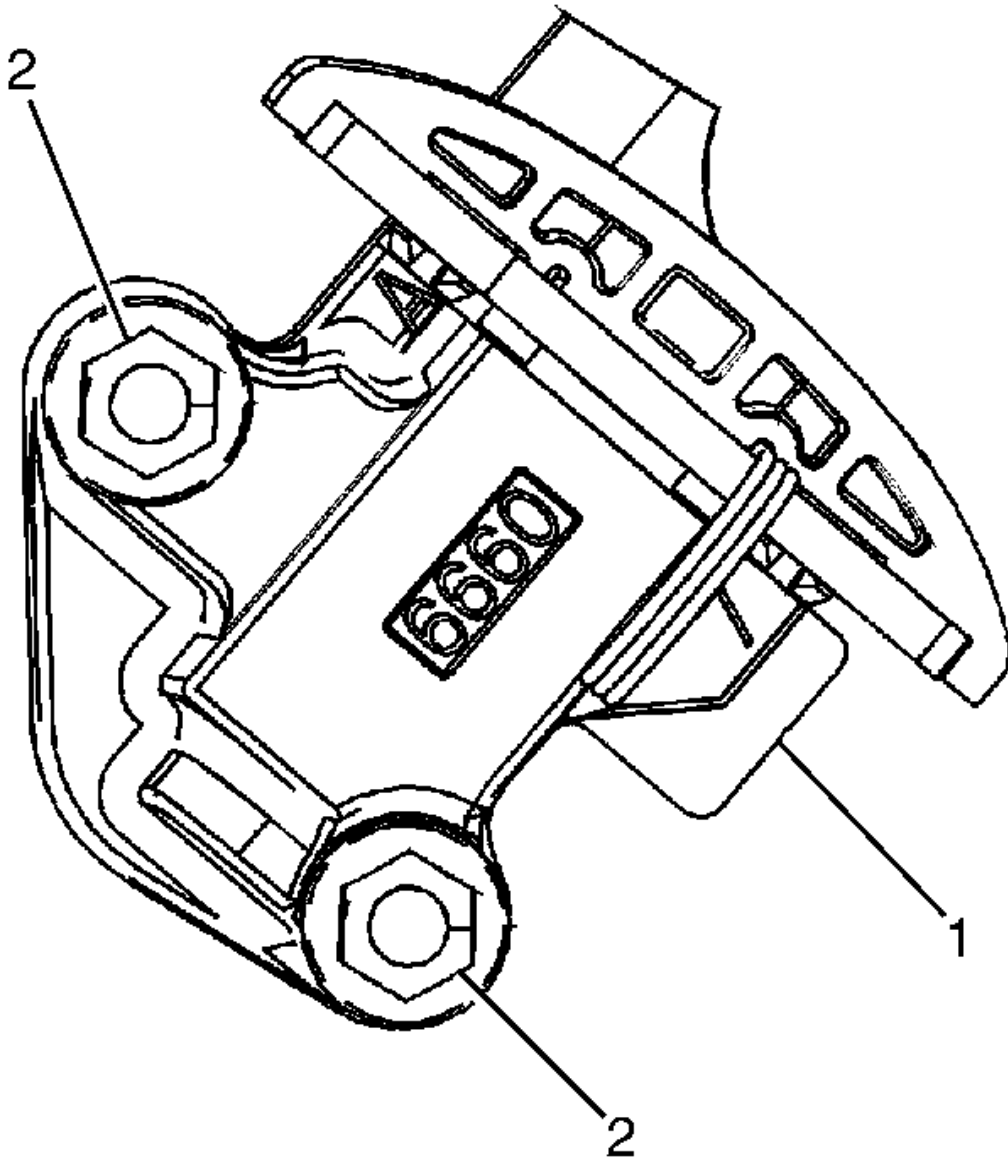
View Of Primary Camshaft Drive Chain Tensioner, Gasket & Bolts
